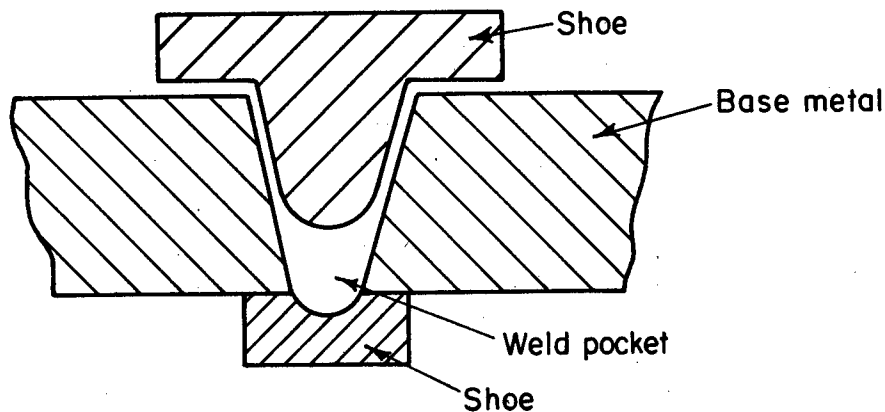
SHOE DESIGN FOR FIRST PASS OF A MULTIPASS WELD USING A SINGLE-VEE JOINT
